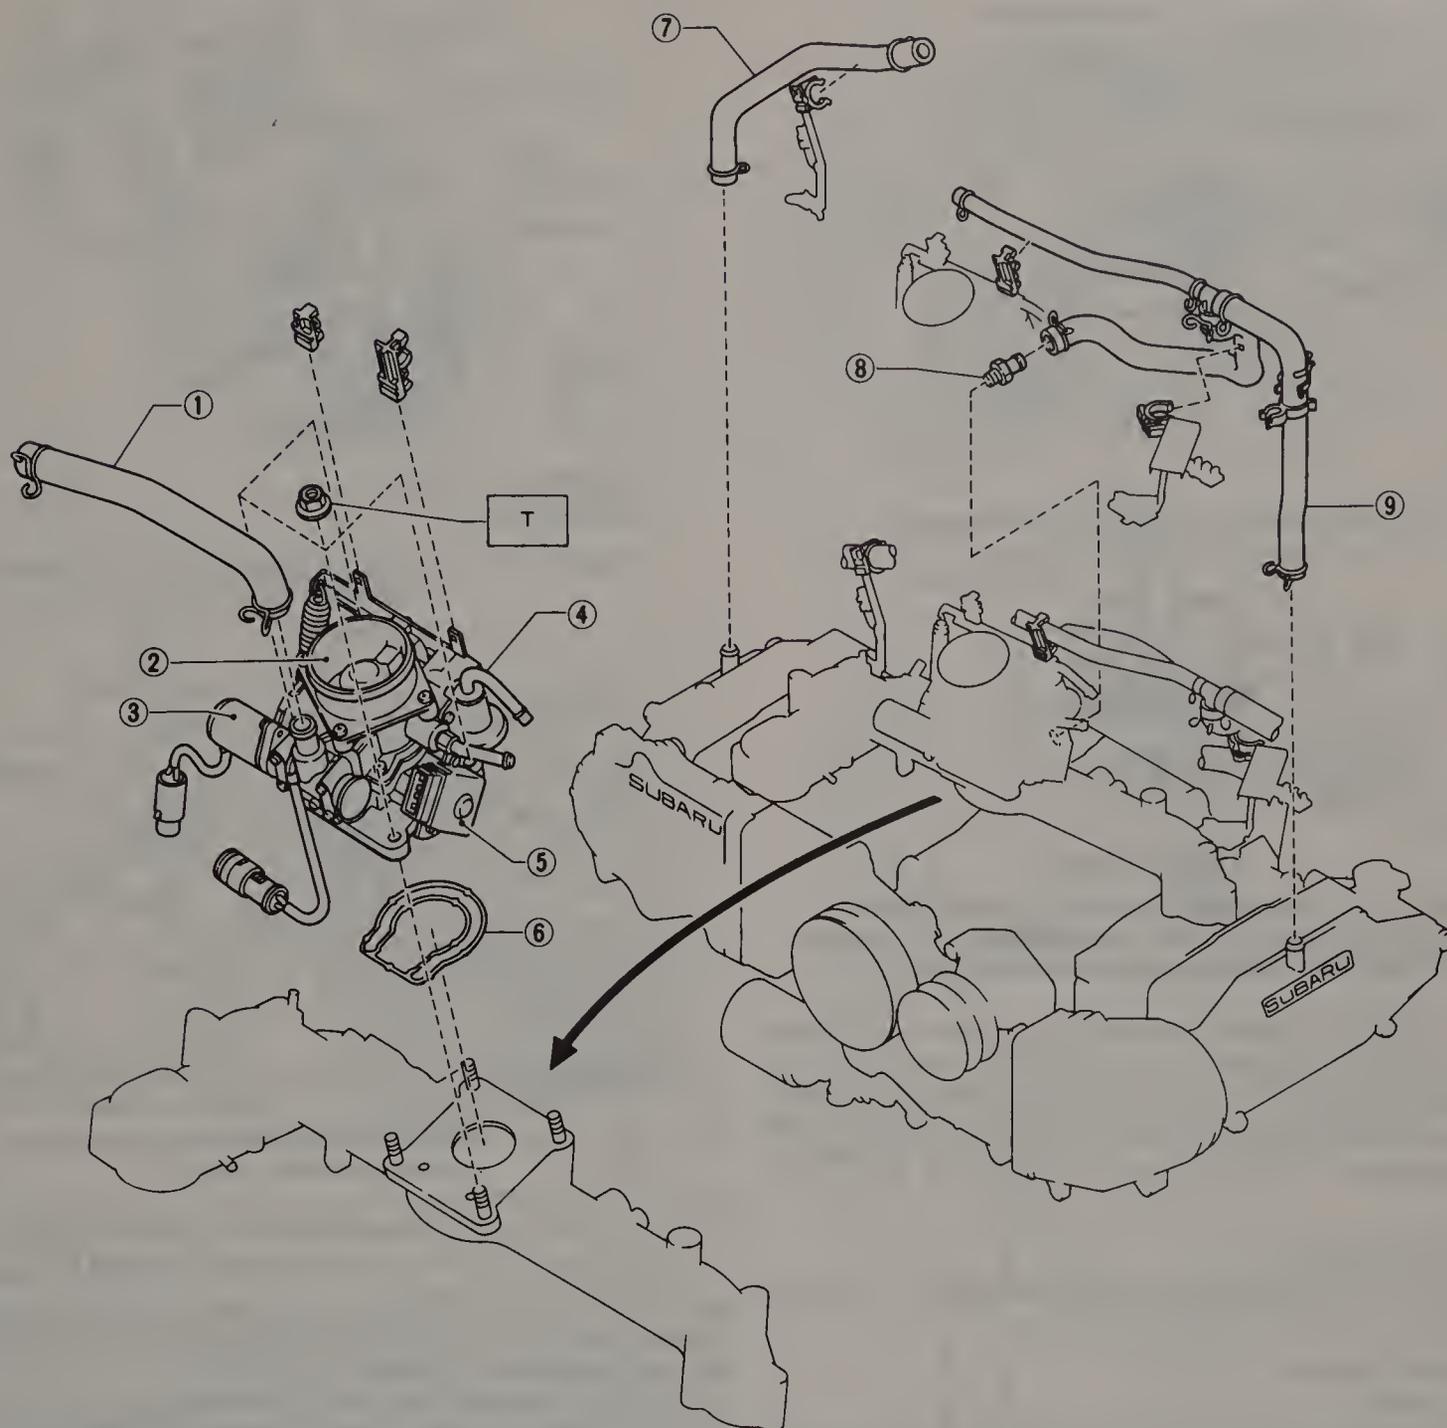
Throttle chamber and related components — exploded view (Sec 8)
